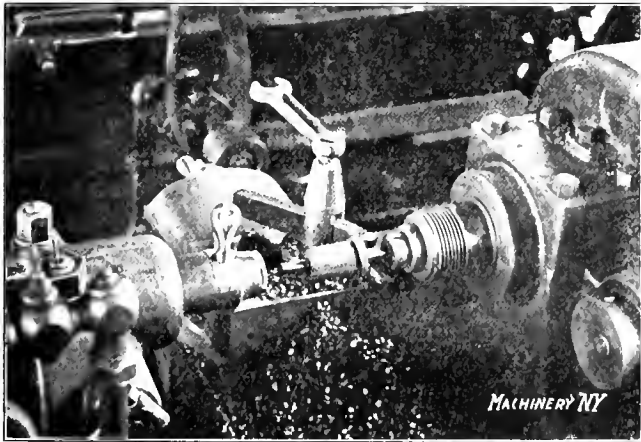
Special Mandrel used to hold Reverse Plate Gear Bushing
